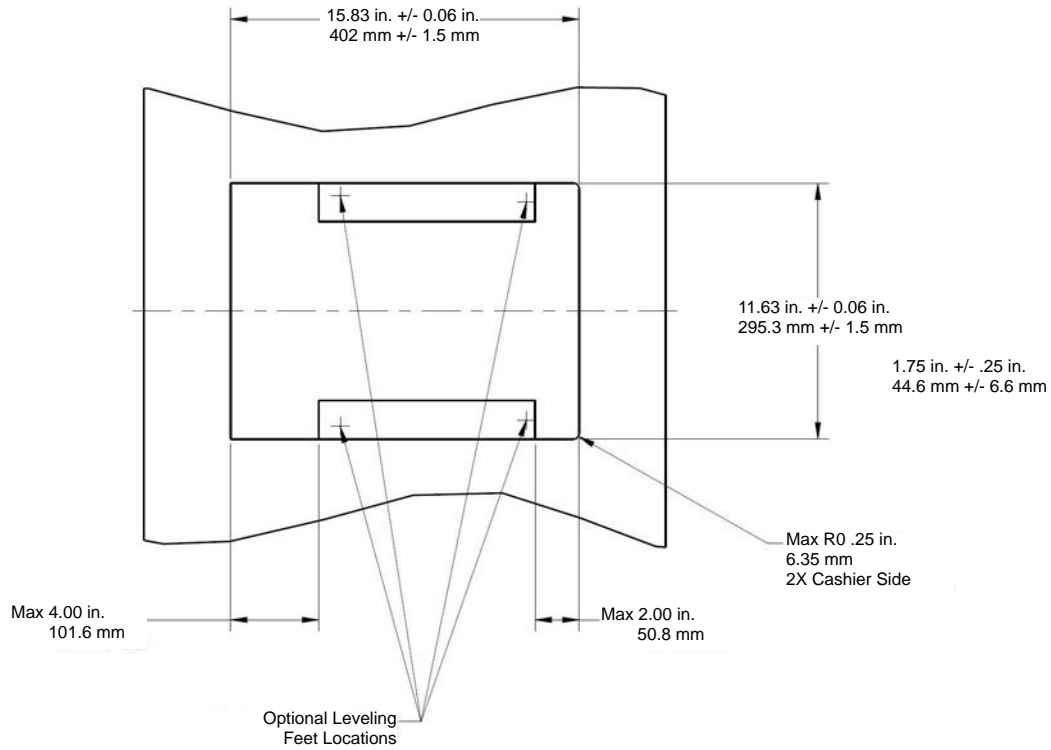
MP6000 - Medium Unit Counter Cutout
